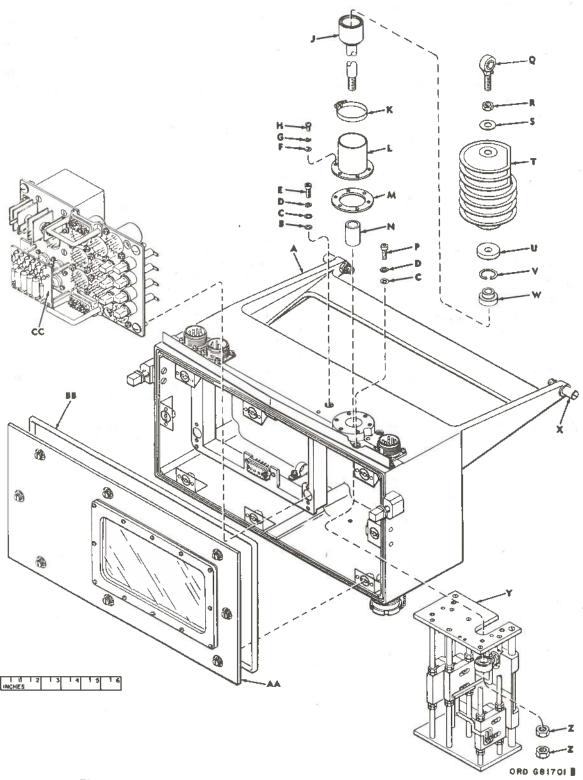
Disassembly and assembly of electro-mechanical control box 9007806.
